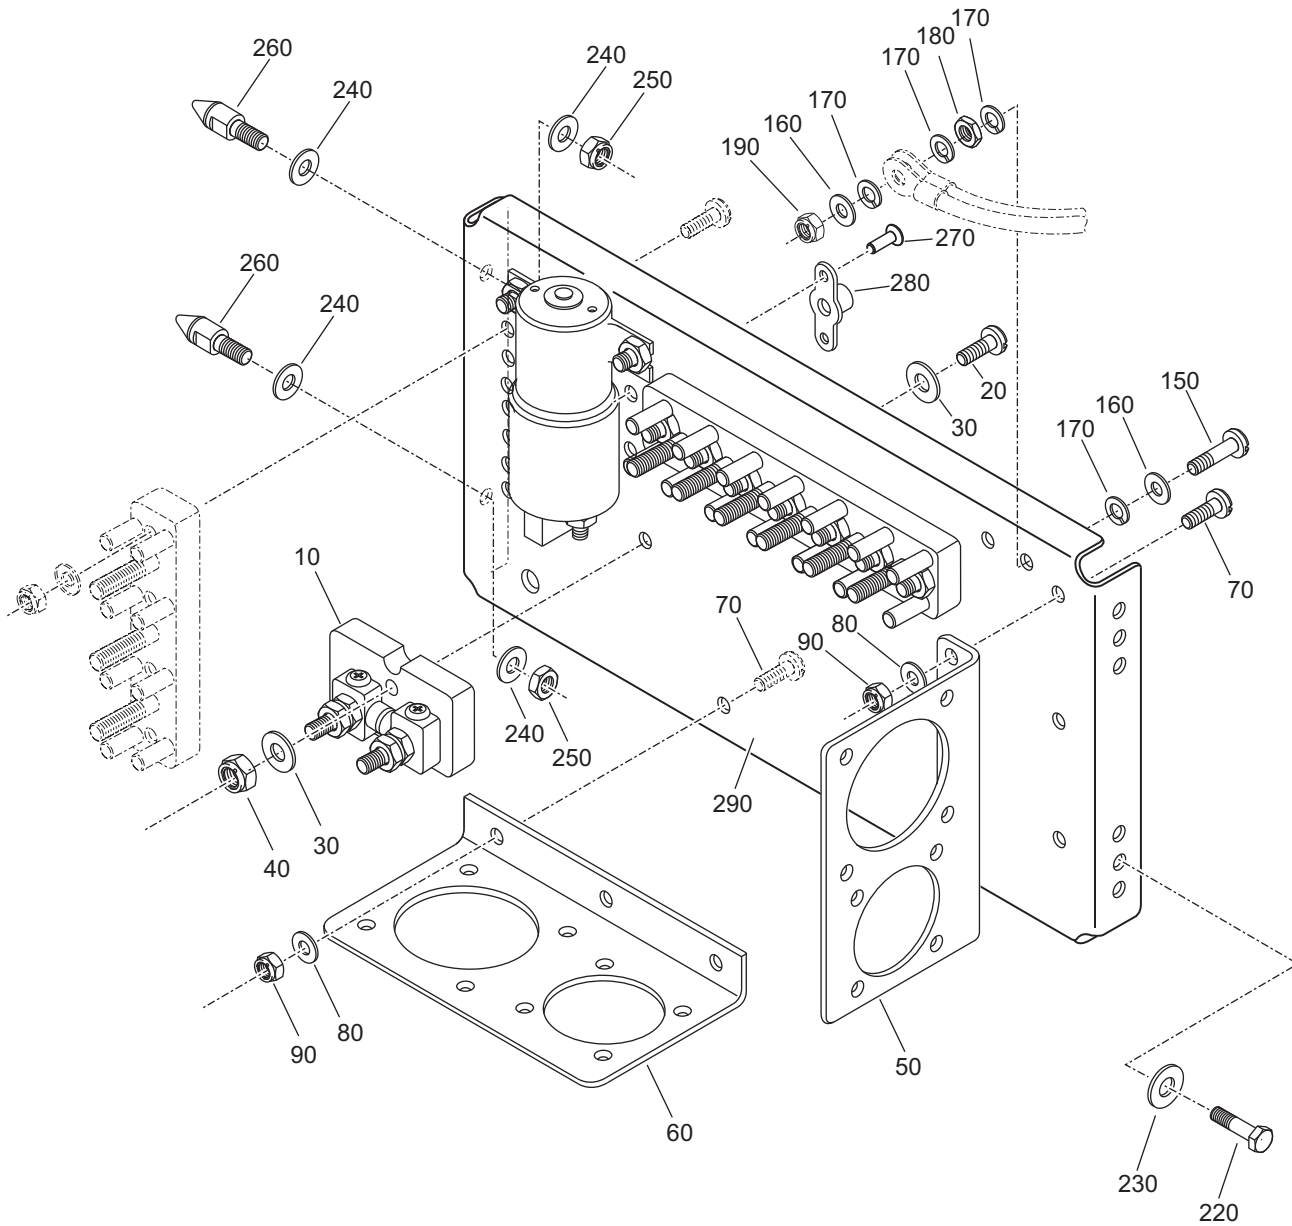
Relay Panel Plate Assembly (Sheet 1 of 2) - LH Shown
